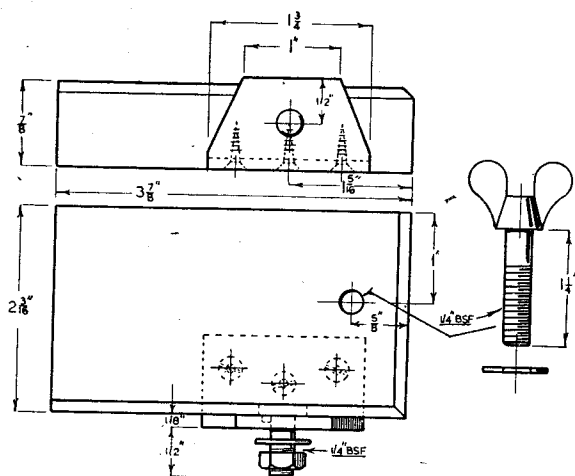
The wooden base with the grinding rest mounting and the fixing screw
